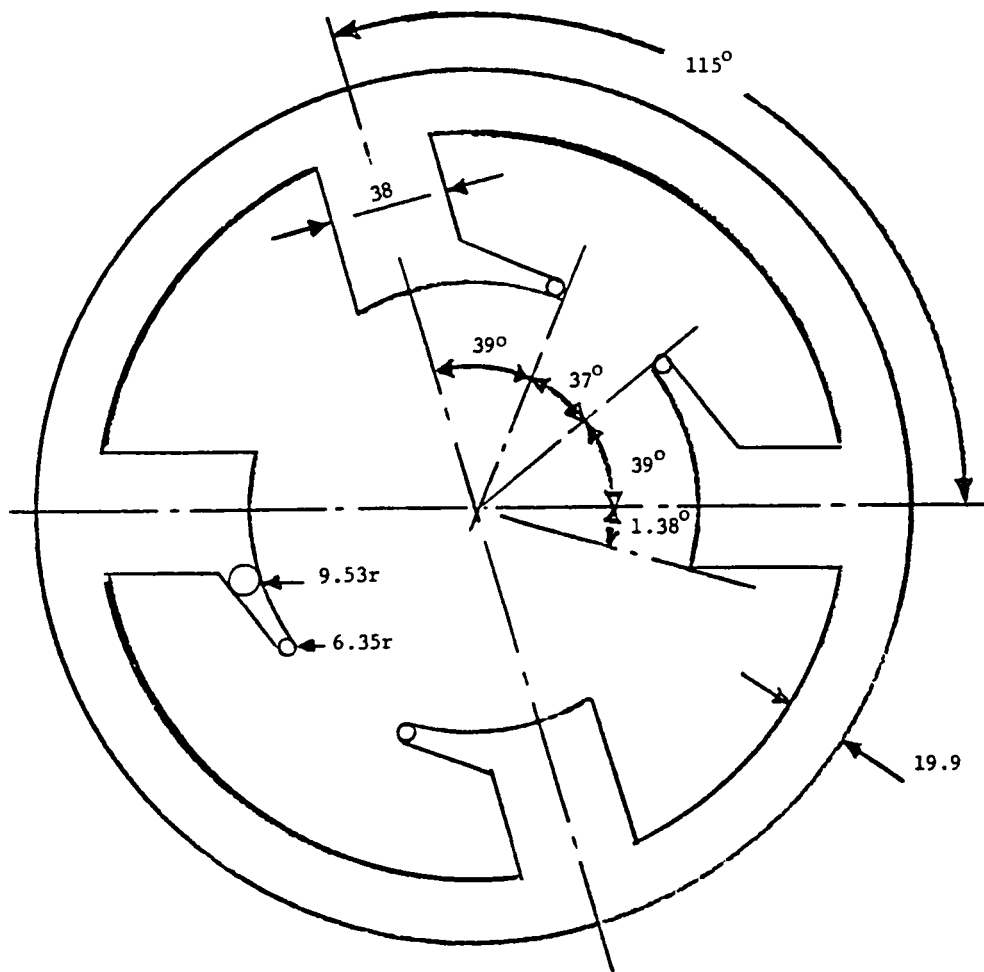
BLUE Motor, Frame Dimensions (in millimeters)
